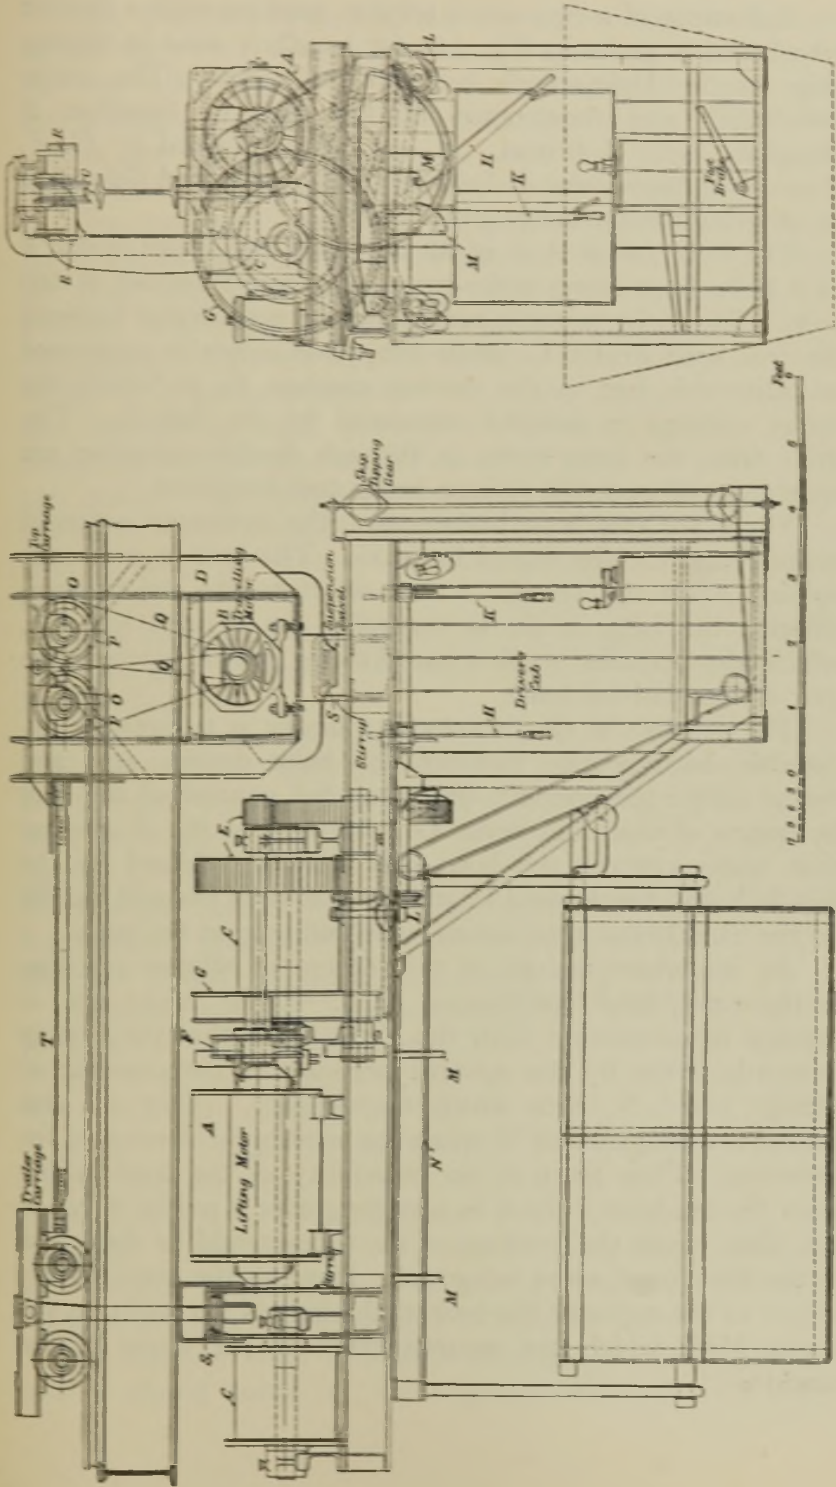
Heavy Type of Telfer Machine for Coke.
